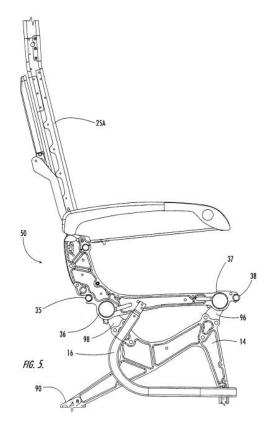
Passenger seat construction: 14 – leg modules; 16 – baggage guard
